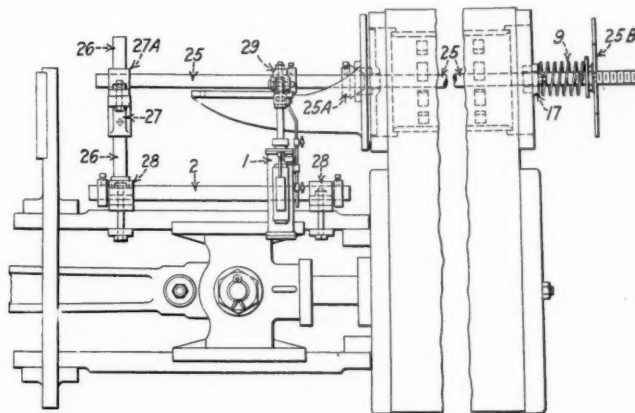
Set-up for grinding in a back valve chamber head when the crosshead and main rod are not removed
